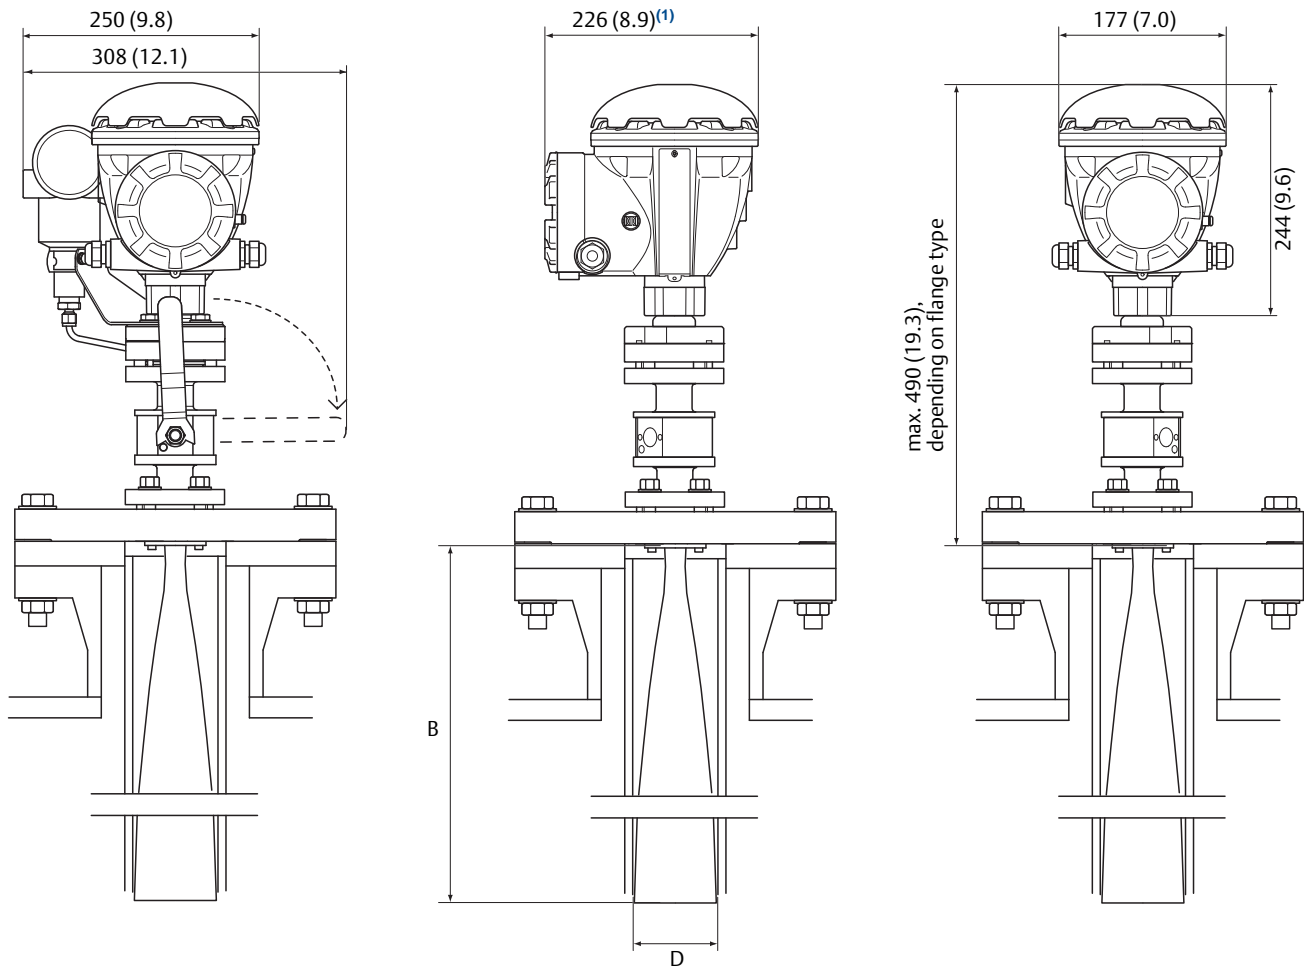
Rosemount 5900S with Still-Pipe Array Antenna Dimensions
